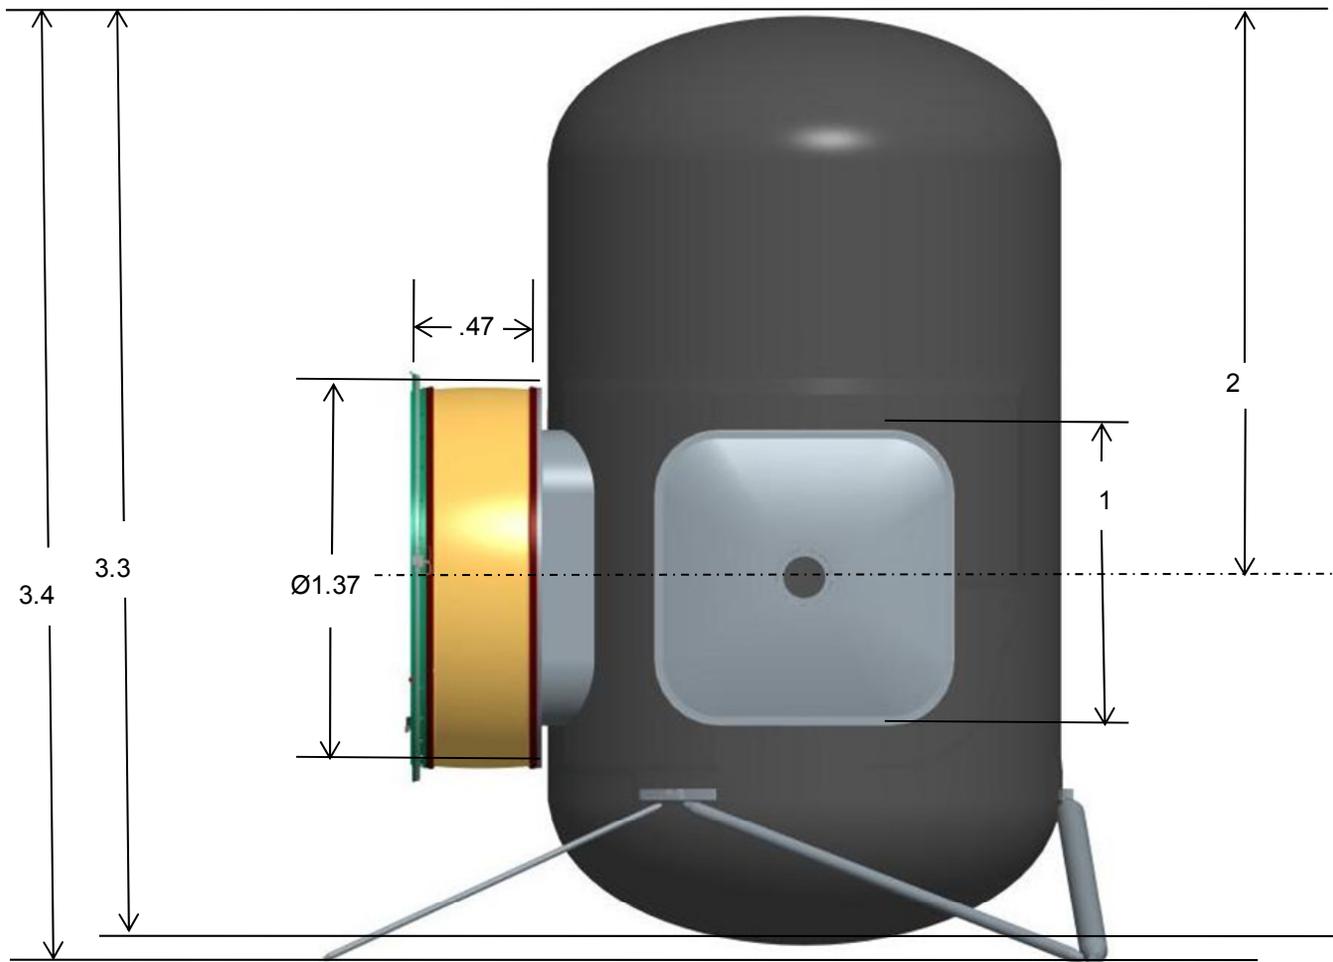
Overall dimensions of airlock used in mock-up fabrication (dimensions in meters).
